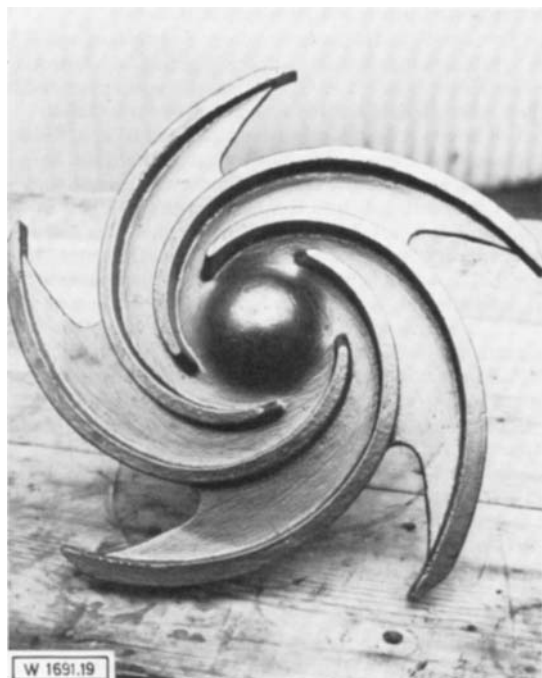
Cast Ferralium alloy impeller for cargo pump of multi-purpose chemical tanker
